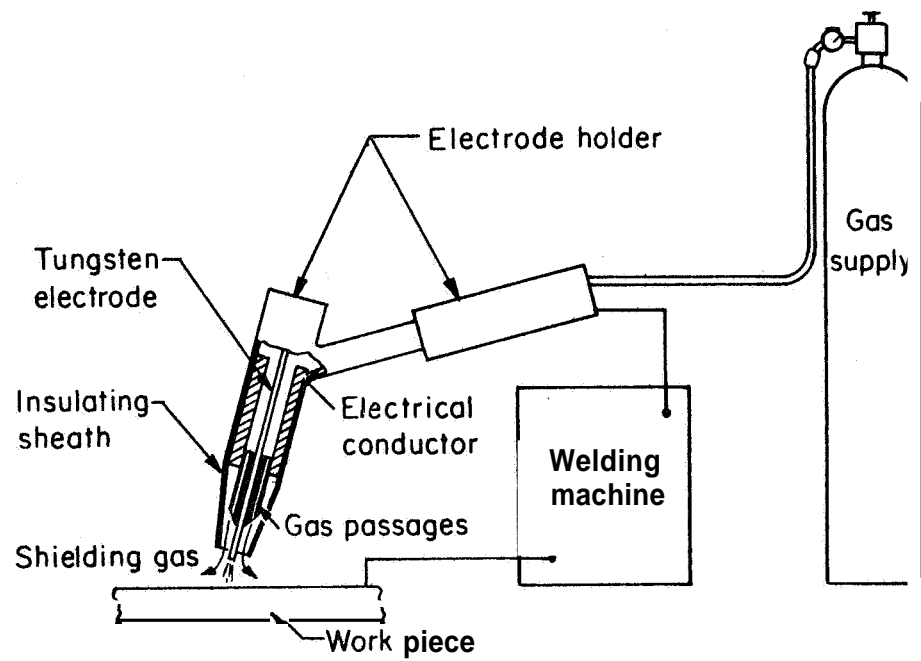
SKETCH OF A GAS TUNGSTEN-ARC WELDING SYSTEM (Ref. 29)
